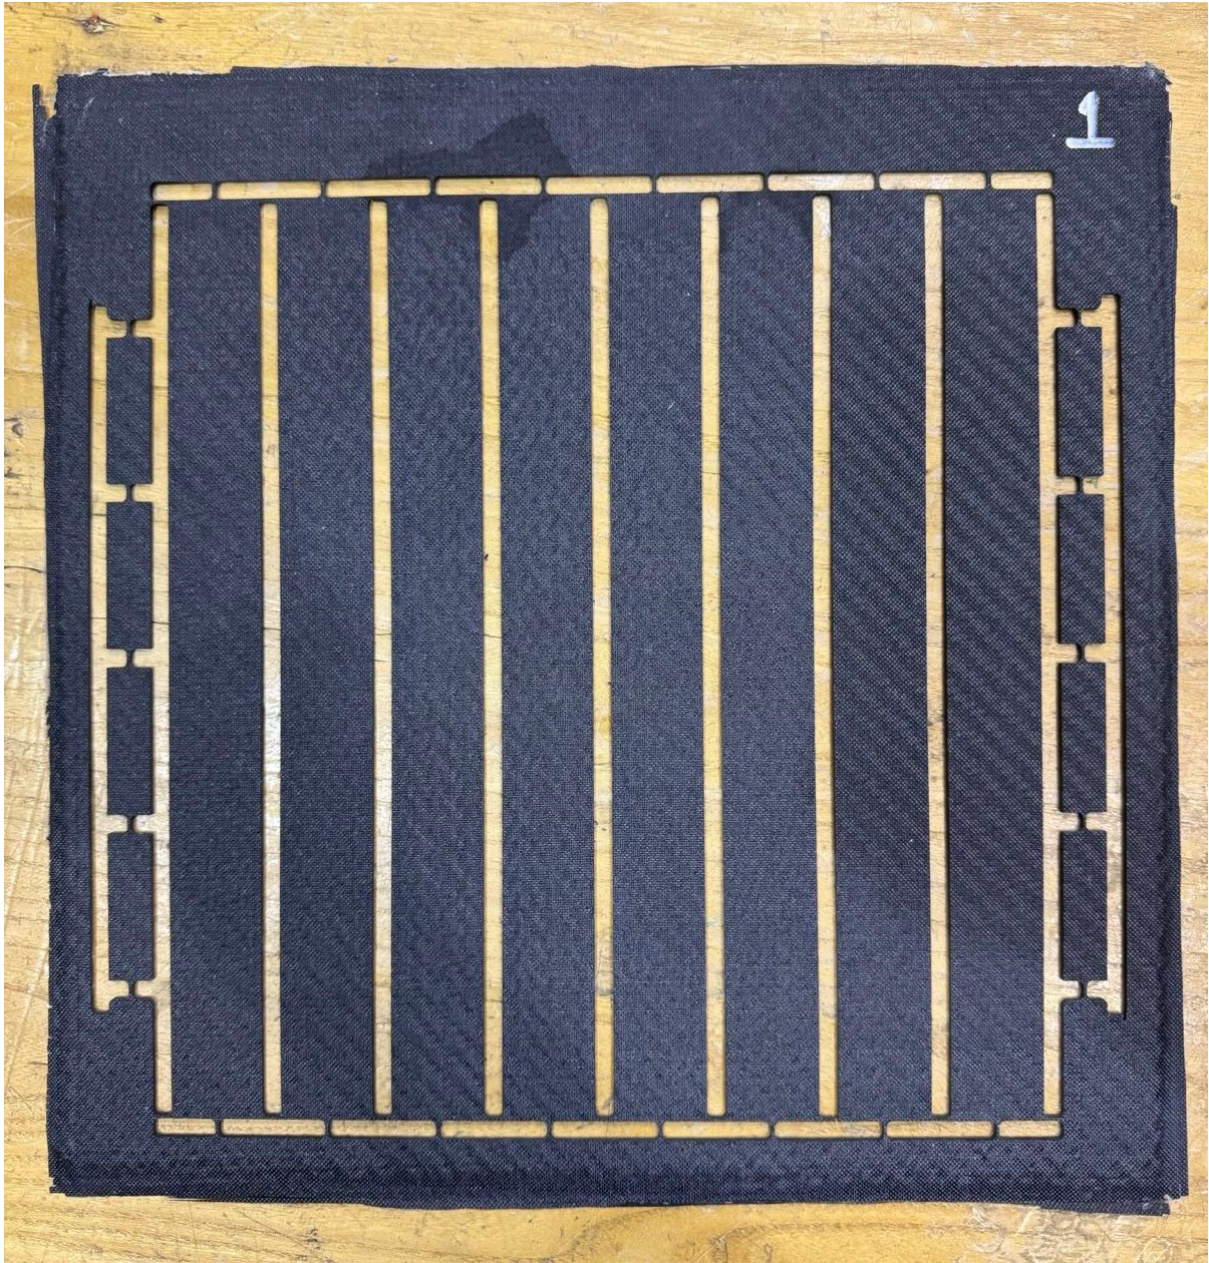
Composite plate with eight tensile specimens and eight short beam specimens cut by abrasive waterjet machining
